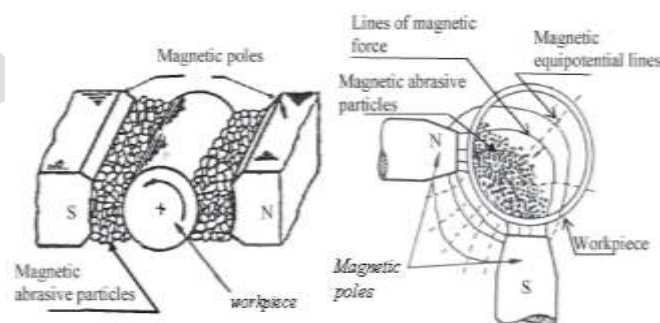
External cylindrical finishing      Fig 1.2. Internal cylindrical finishing
